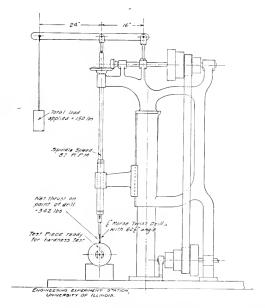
Drill Press, Showing Method of Making Hardness Tests on Cast-Iron Test Pieces
